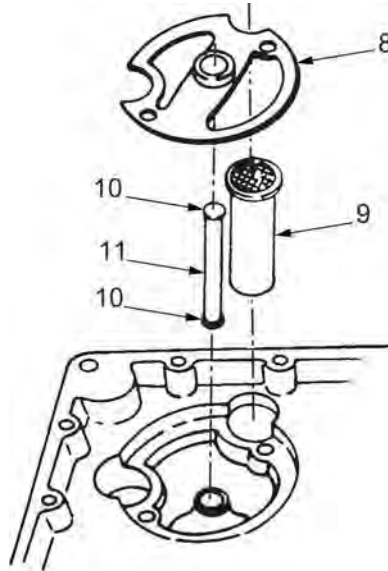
Equalizer Valve Diaphragm, Oil Transfer Tube, and Scavenge Tube Assembly Removal.
